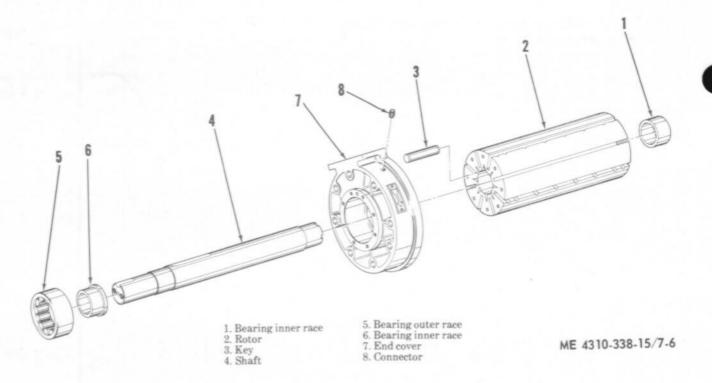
Drive end cover-rotor; disassembly and reassembly.
